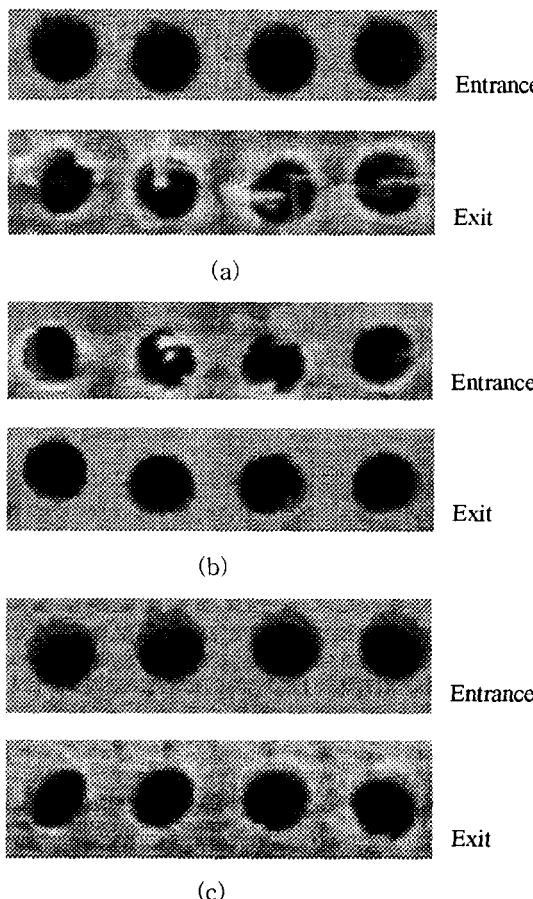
Photographs of the drilled holes after sanding of laminating surface
